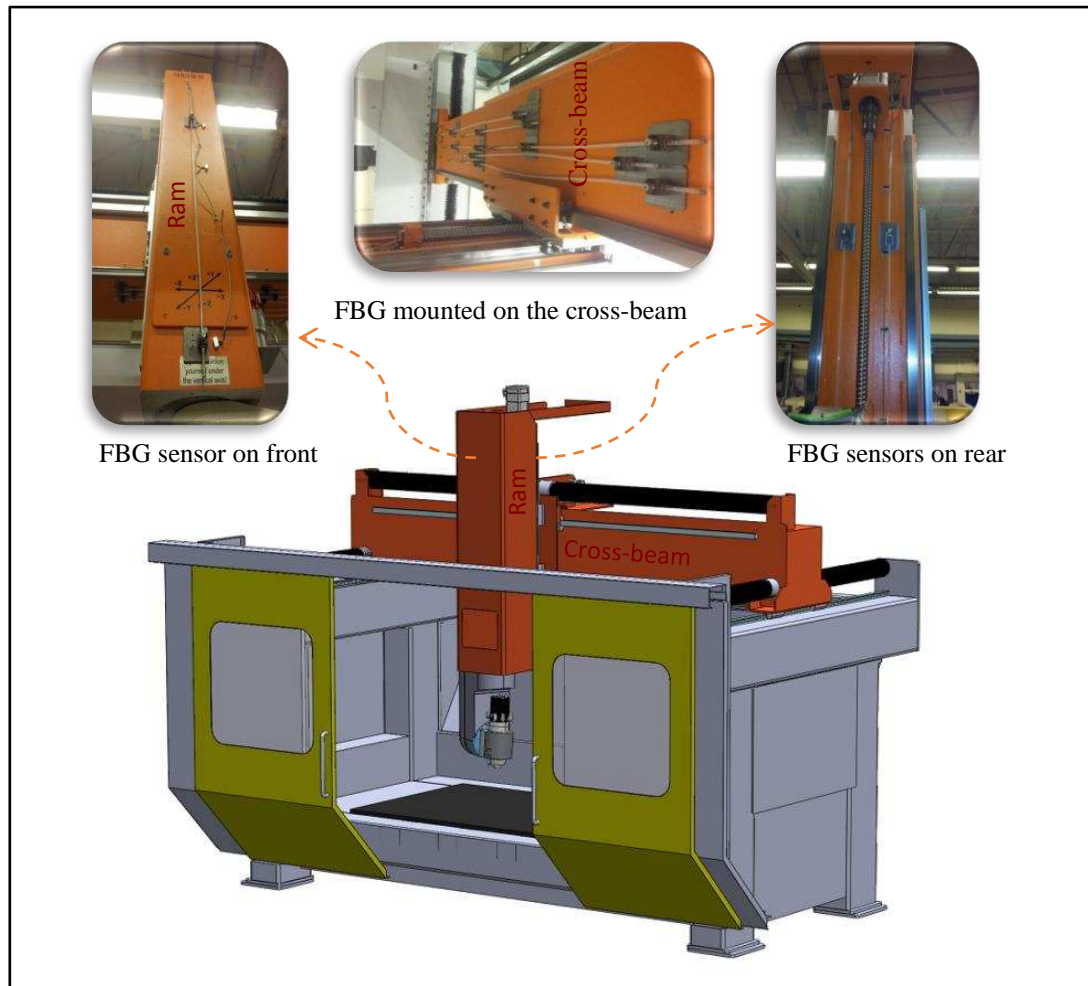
A general overview of the 5-axis milling machine and location of the (FBG).
